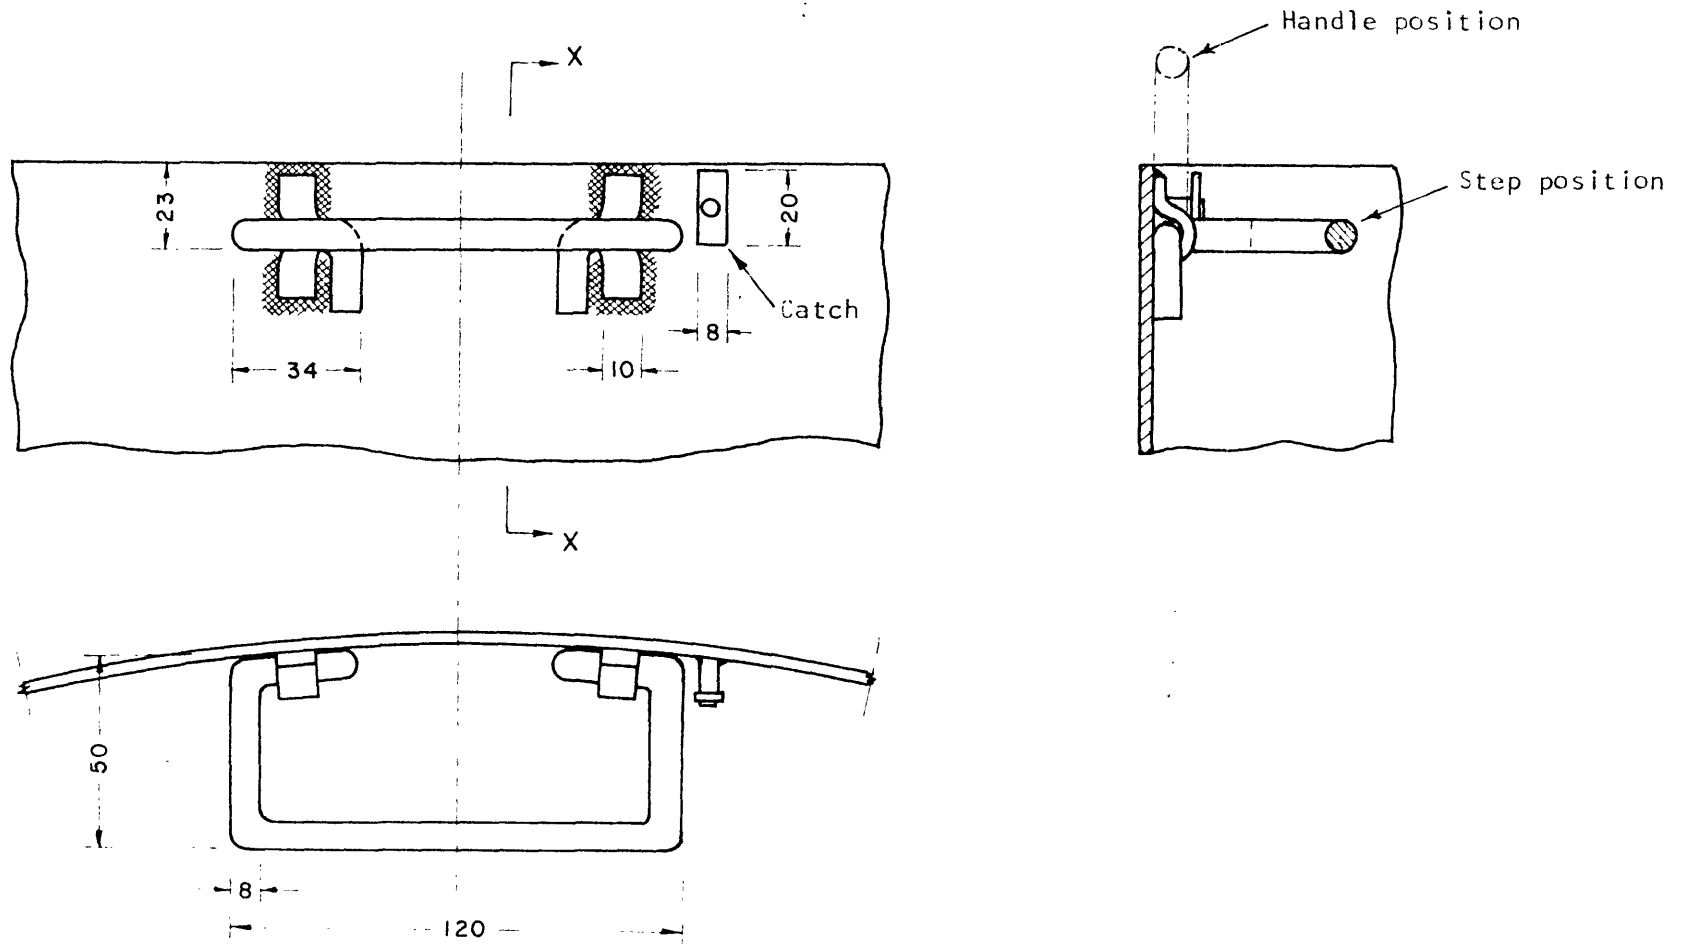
Combined step and handle used in the expandable steel rings for support of test pit walls
